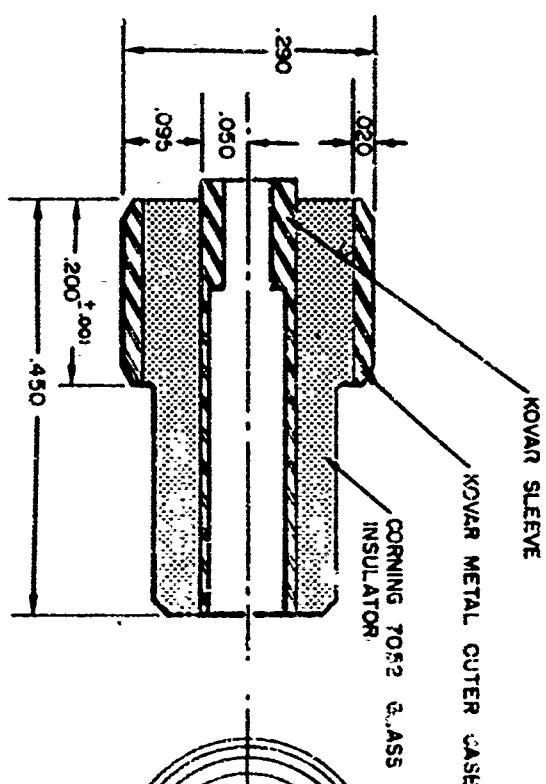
Final Design, Prototype Glass-to-Metal Seal Headers.
